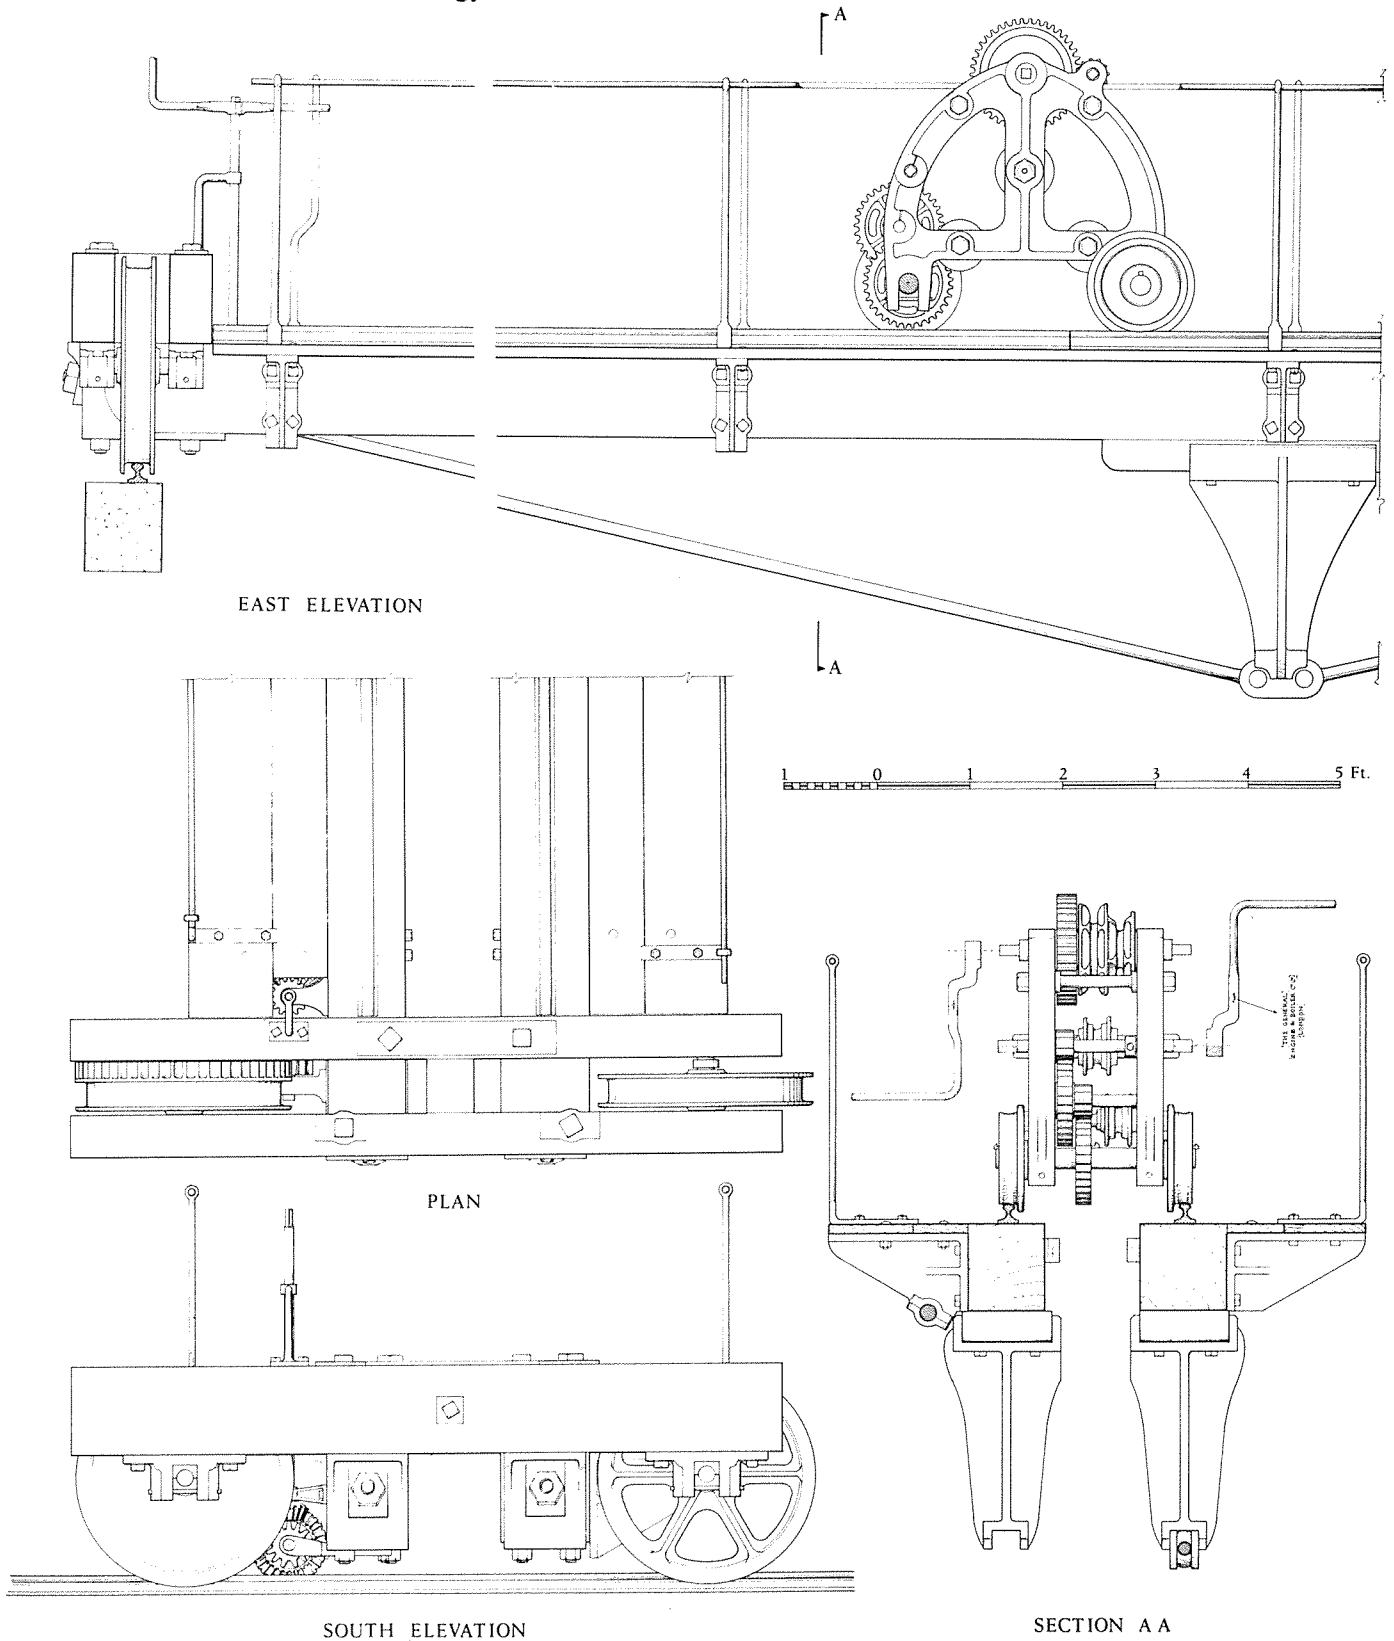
Detailed drawing of the overhead crane. Drawn by John Sambrook of G.L.C. Historic Buildings Division
